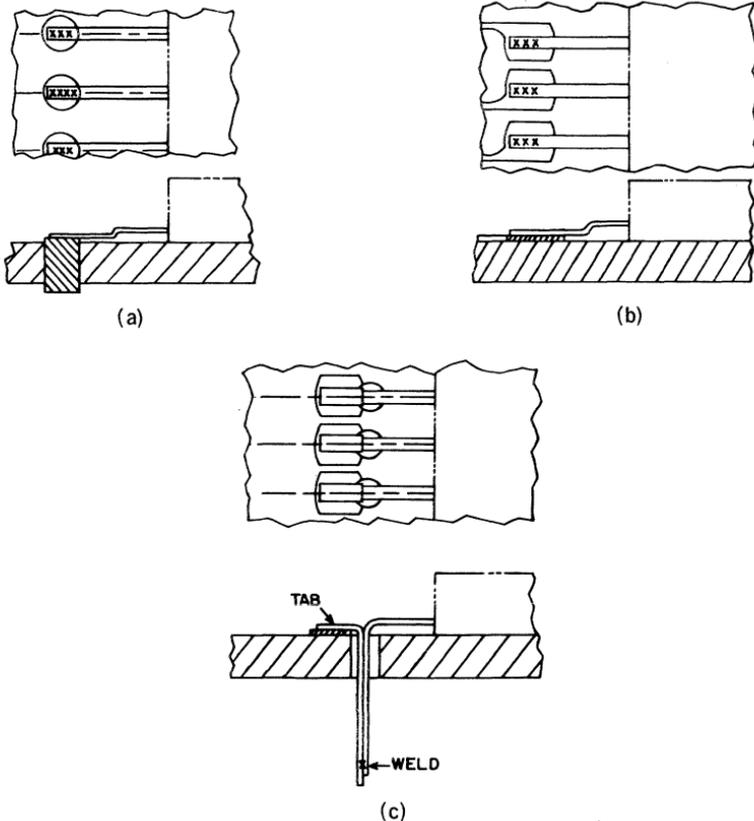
Welded connection methods for mounting RCA 14-terminal flat packs: (a) post method; (b) surface-pad method; (c) tab method.
